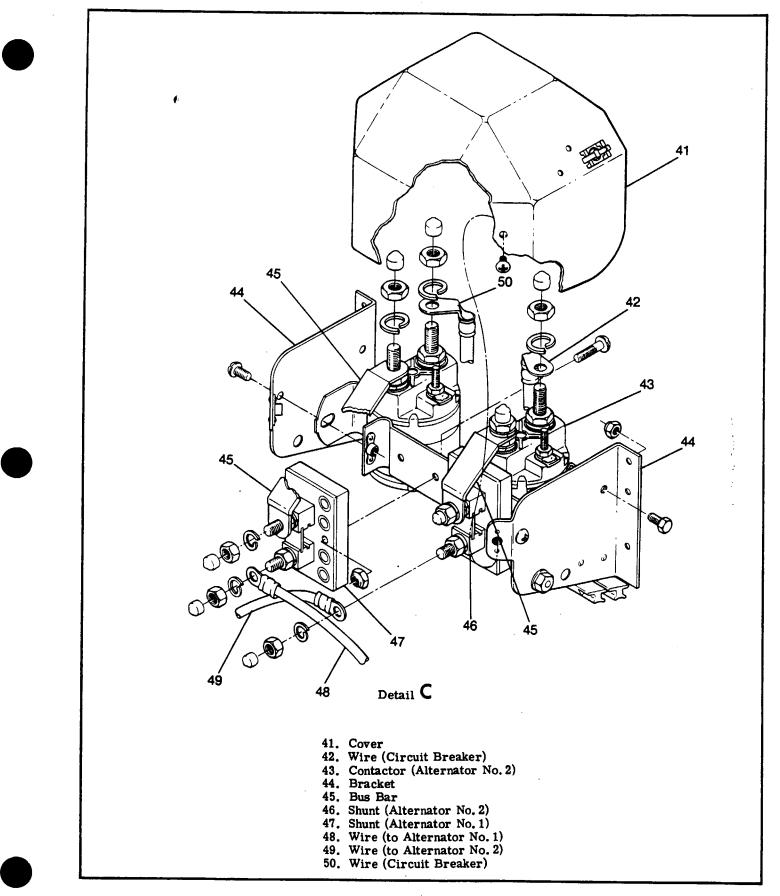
Dual Alternator System Installation (Sheet 4 of 7)
